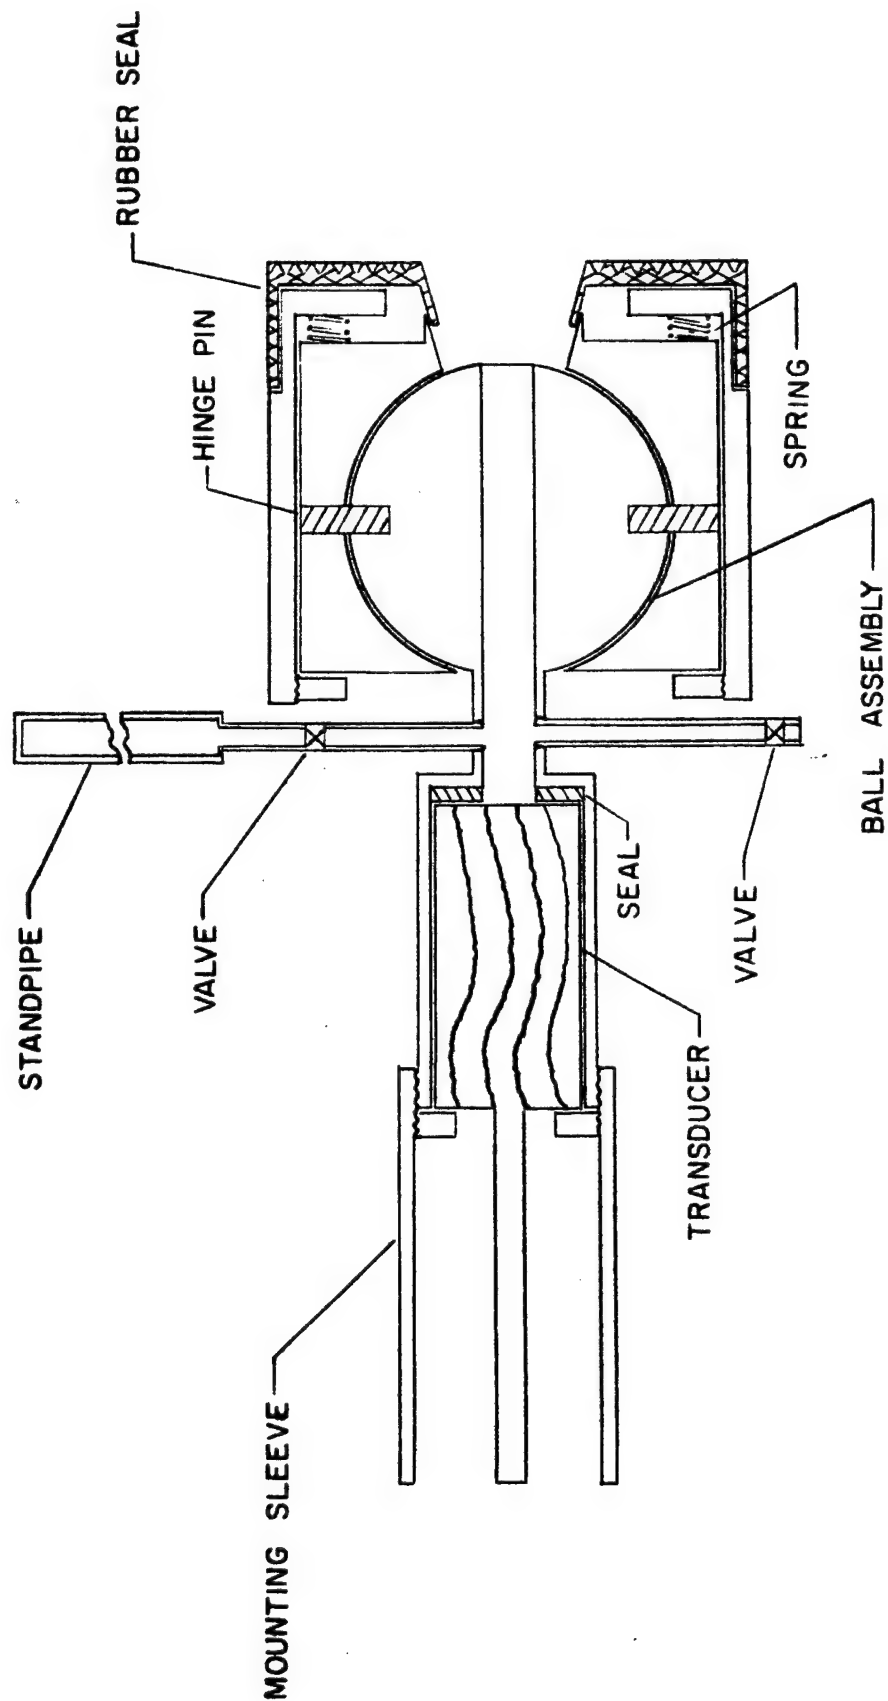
SKETCH OF STATIC WATER COLUMN COUPLING
